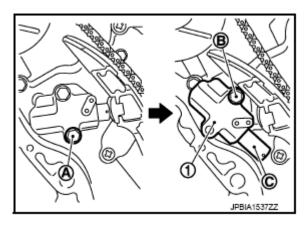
Identifying Timing Chain Tensioner, Plunger And Mounting Bolts Courtesy of NISSAN NORTH AMERICA, INC.
